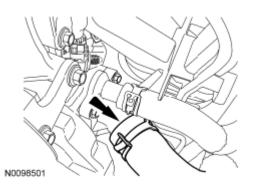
Locating Lower Radiator Hose Of Thermostat Housing Courtesy of FORD MOTOR CO.
